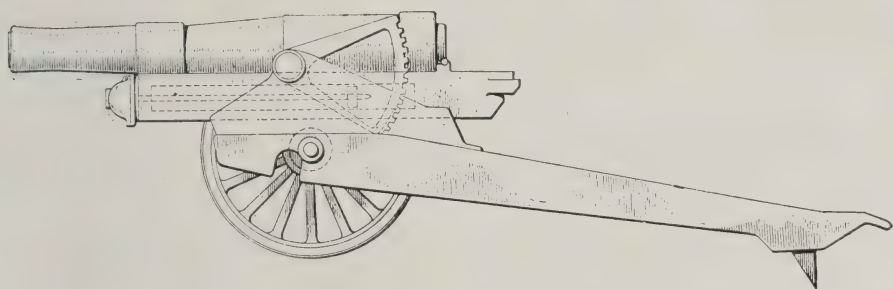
Showing the Component Parts of a Recoil Type of Gun
